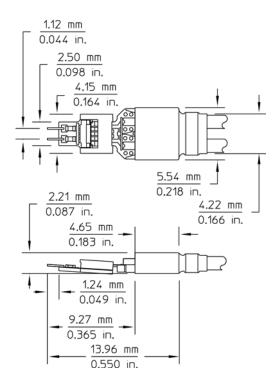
N5425A ZIF Probe Head Dimensions with ZIF Tip Attached
